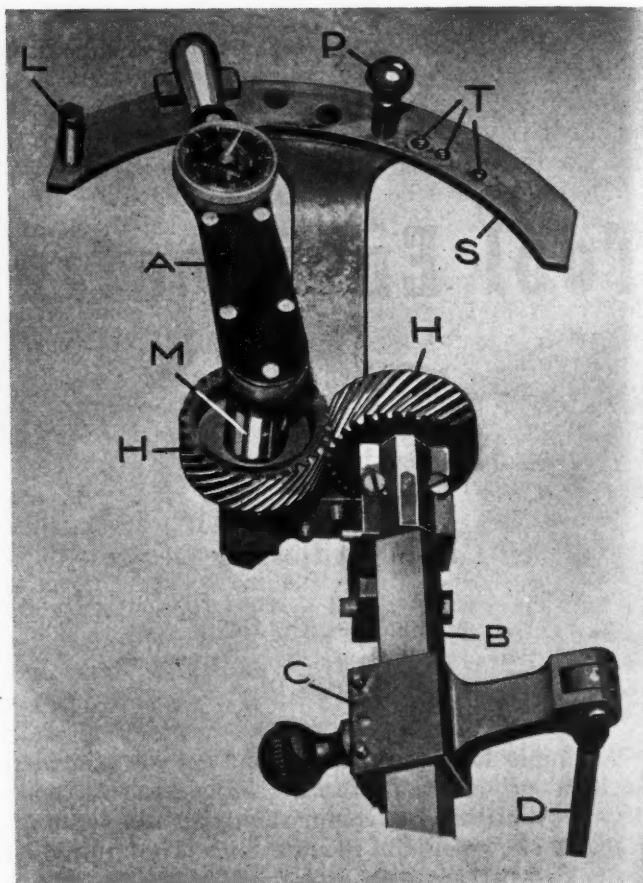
Enlarged Top View of a Portion of the Tool Shown in Fig. 1. The Dial of Torque-wrench A Indicates the Tension of the Springs in the Brush-holder
